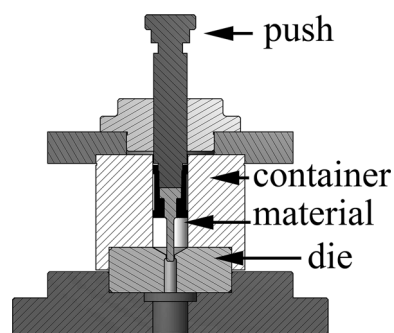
Extruding tools assembly, the Institute of Non-Ferrous Metals in Skawina
